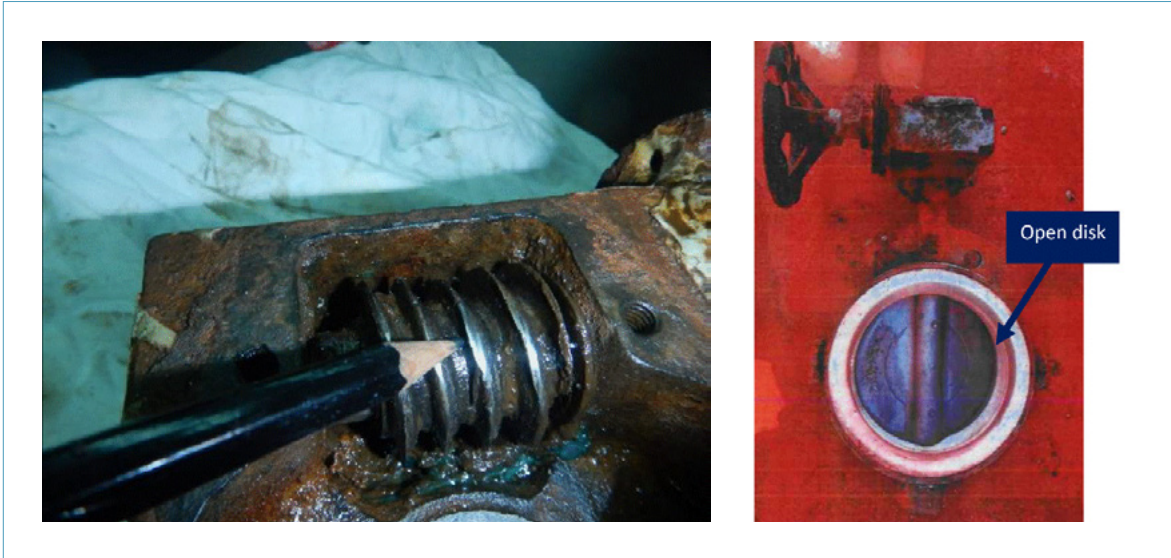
On the left, damaged worm gear, and on the right the disk still open in closed position.
